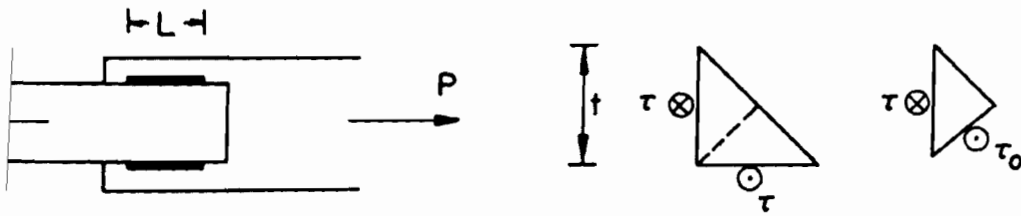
Lap-Joint, Transverse Fillet Weld Specimen
